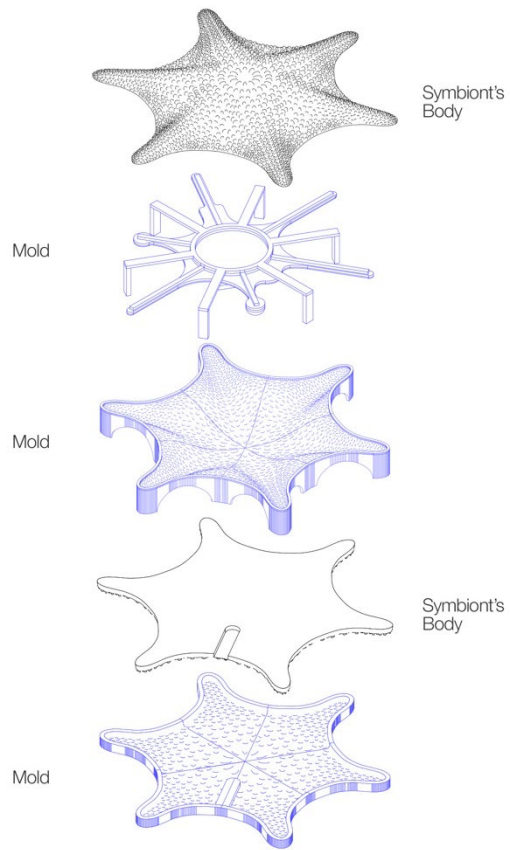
Symbiont's Exploded View from Mold and Casted Parts, designed and 3D modelled by author
